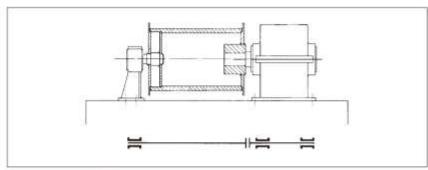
Rigid mounting of gearbox-drum connection Support at three points.
